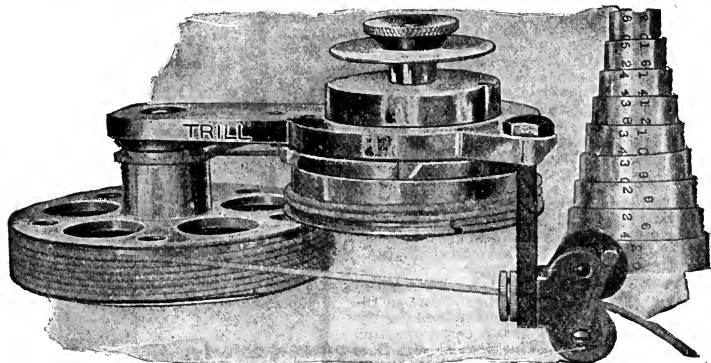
,528.—Trill reducing wheel with nine additional bushings giving 18 reductions, covering strokes from 6 ins. to 5 ft., with cord hooked direct to the cross head.
